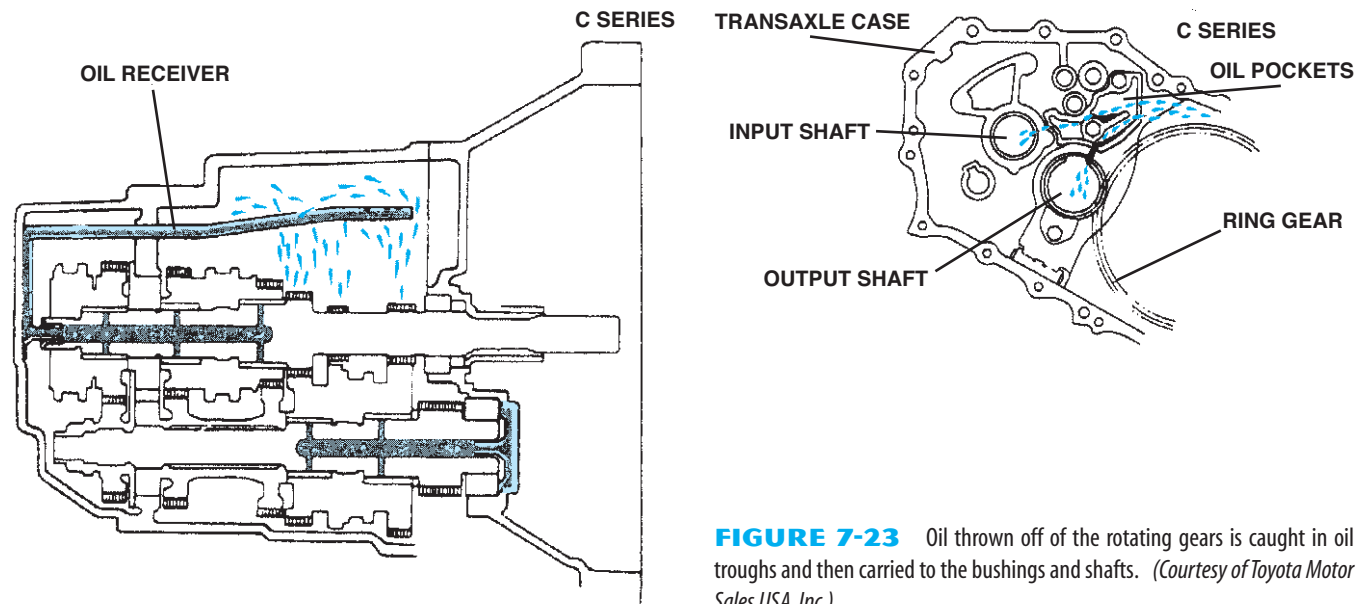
Oil thrown off of the rotating gears is caught in oil troughs and then carried to the bushings and shafts. (Courtesy of Toyota Motor Sales USA, Inc.)
